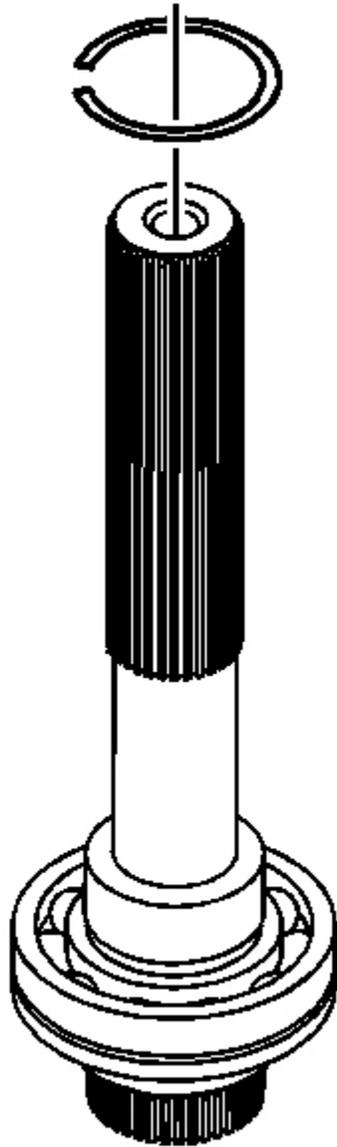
View Of Rear Output Shaft Bearing Retaining Ring
